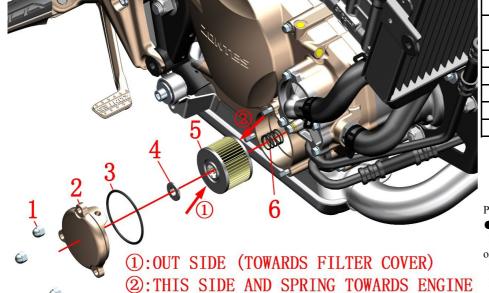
COOLING SYSTEM		Change engine oil filter	СНК	0
